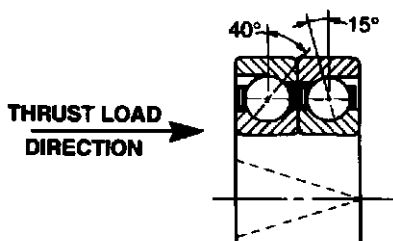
Paired bearing arrangements (SKF USA, Inc.)
